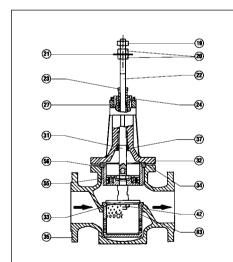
Model 7 single seated valve body direct acting, with double cage seat and perforated trim
